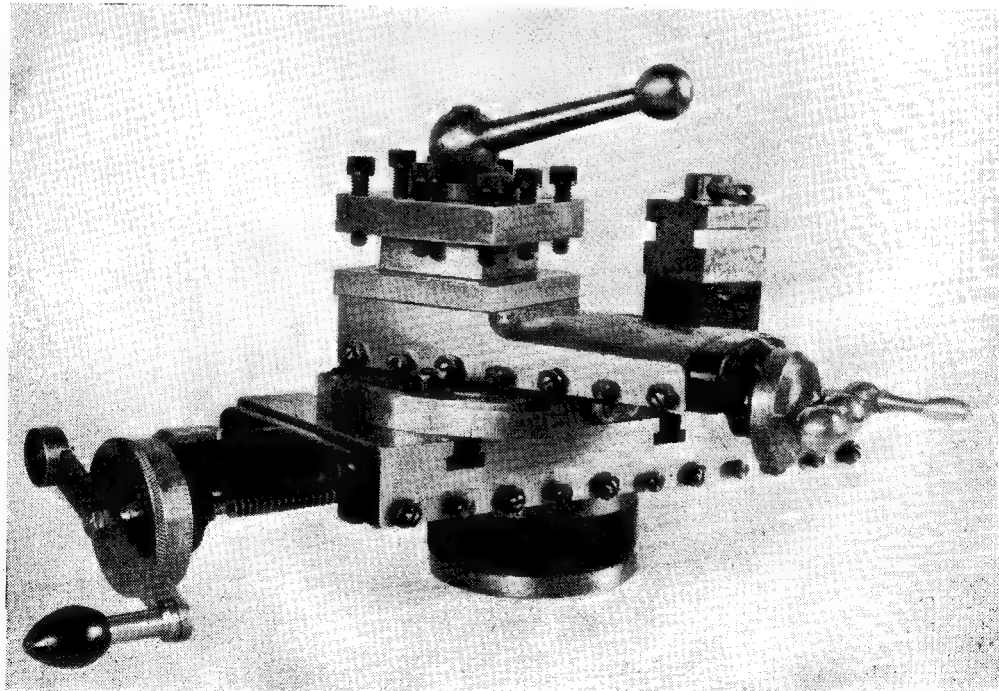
Showing the positions of the locking screws fitted to the top- and cross-slides
